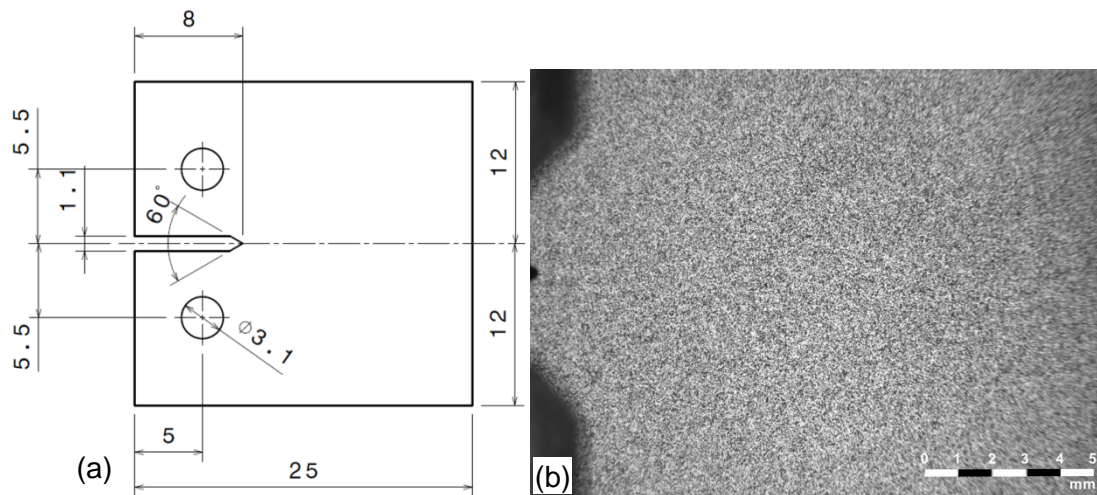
(a) Dimensions of the CT specimens (mm). (b) Illustration of the speckle pattern sprayed onto the specimen surface for making DIC measurements.
